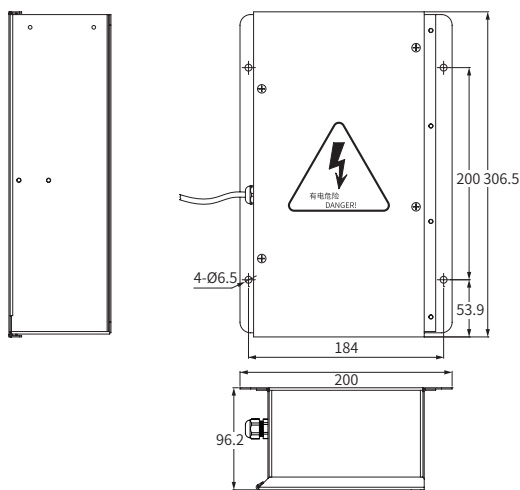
Mounting dimensions of the battery box (unit: mm)
